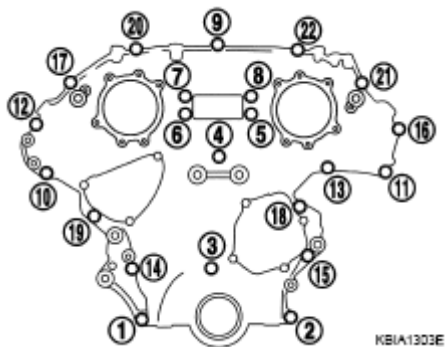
Identifying Front Timing Chain Case Bolts Loosening Sequence
